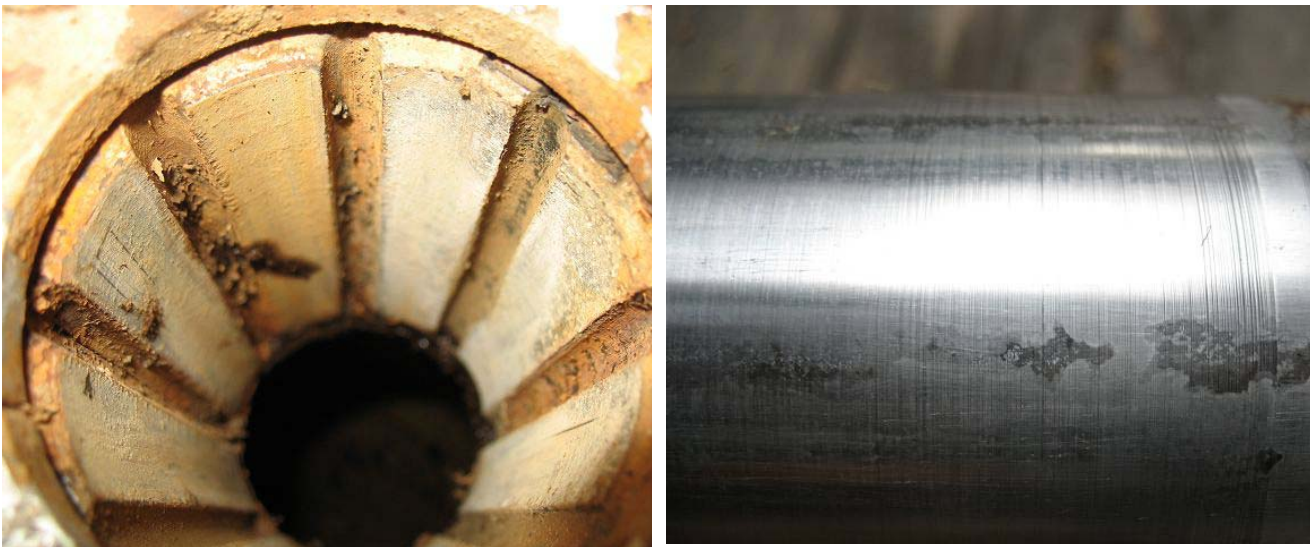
inside of bearing elements and radial bearing section of the turbine runner shaft
